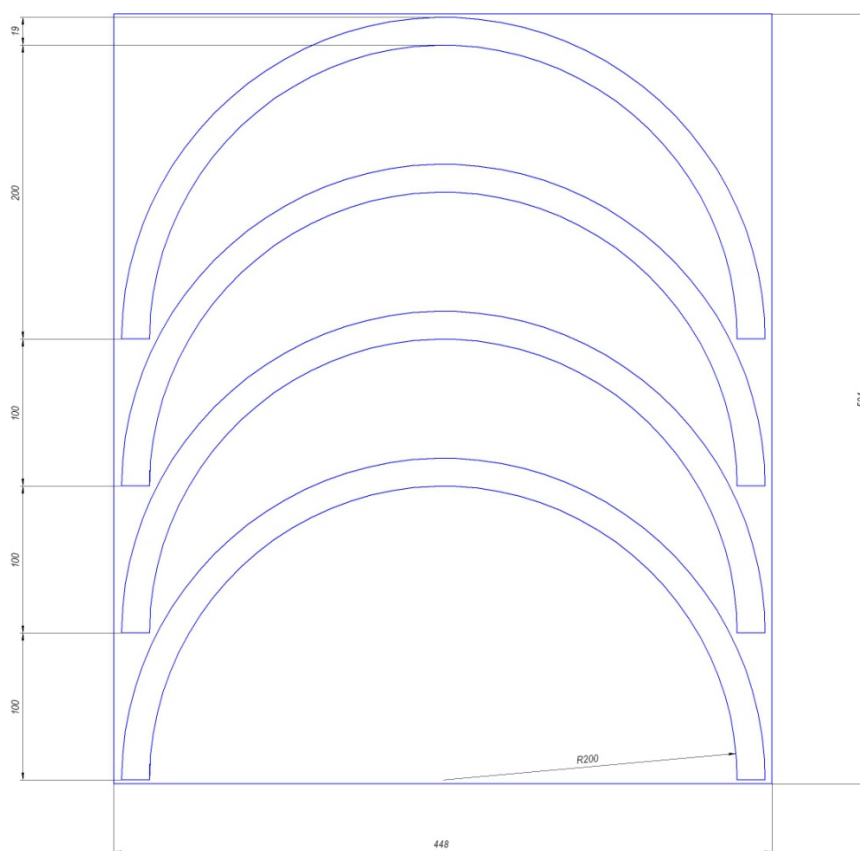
Scheme obtaining of blank from panel board obtained by gluing bars on the smooth surface at width.
